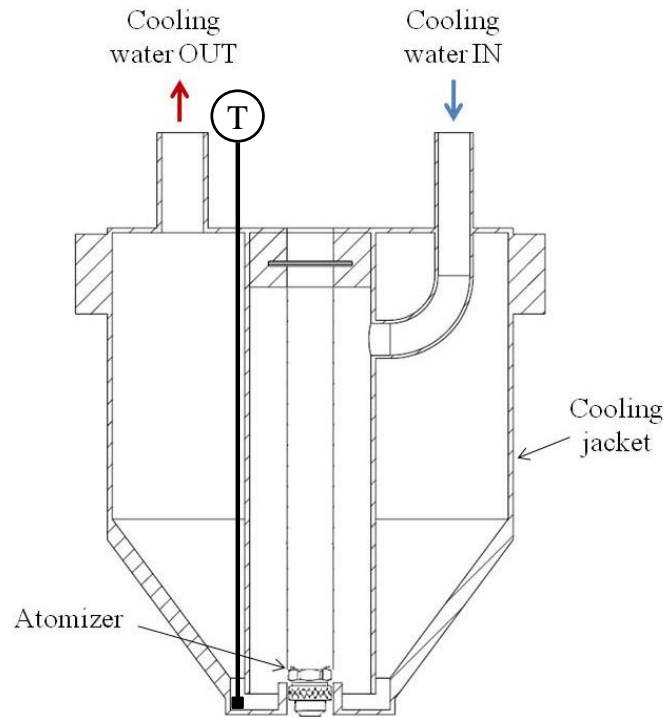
Cross section drawing of cooling jacket and atomizer assembly during gasification run
